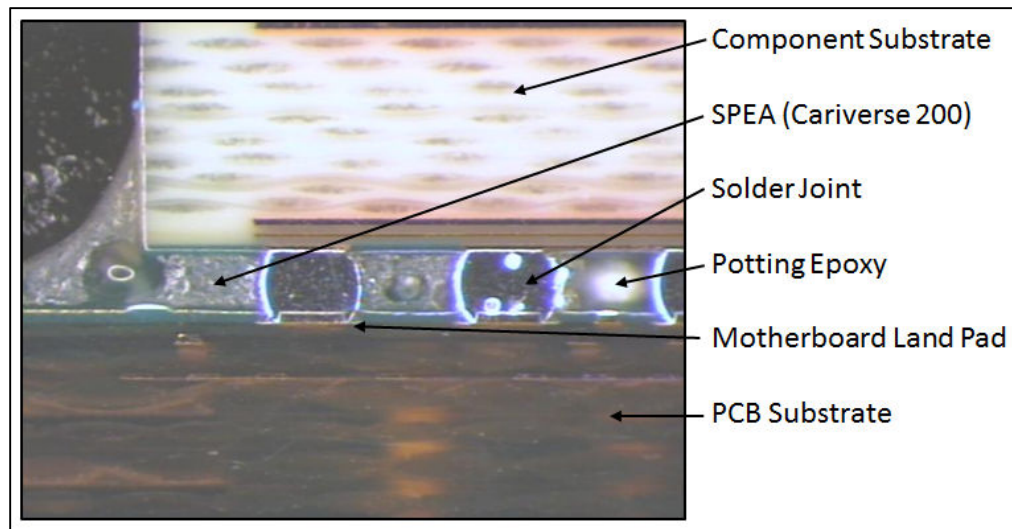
SPEA Assembly, View in Cross Section (Intel Corporation, 2007)
